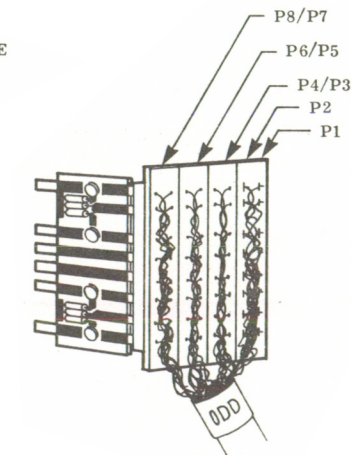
B. Interconnect Boards and Harness Assembly with a Preamplifier #1 Pwa Installed
